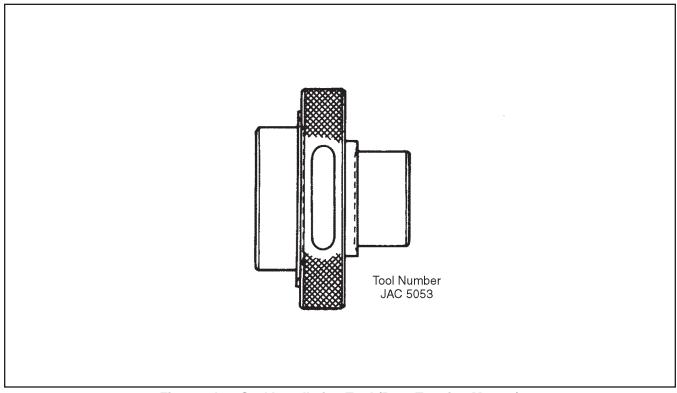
A-2. Seal Installation Tool (Rear Traction Motors)
